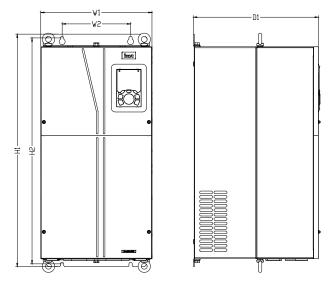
Wall installation diagram of VFDs of 460V 75–110kW
